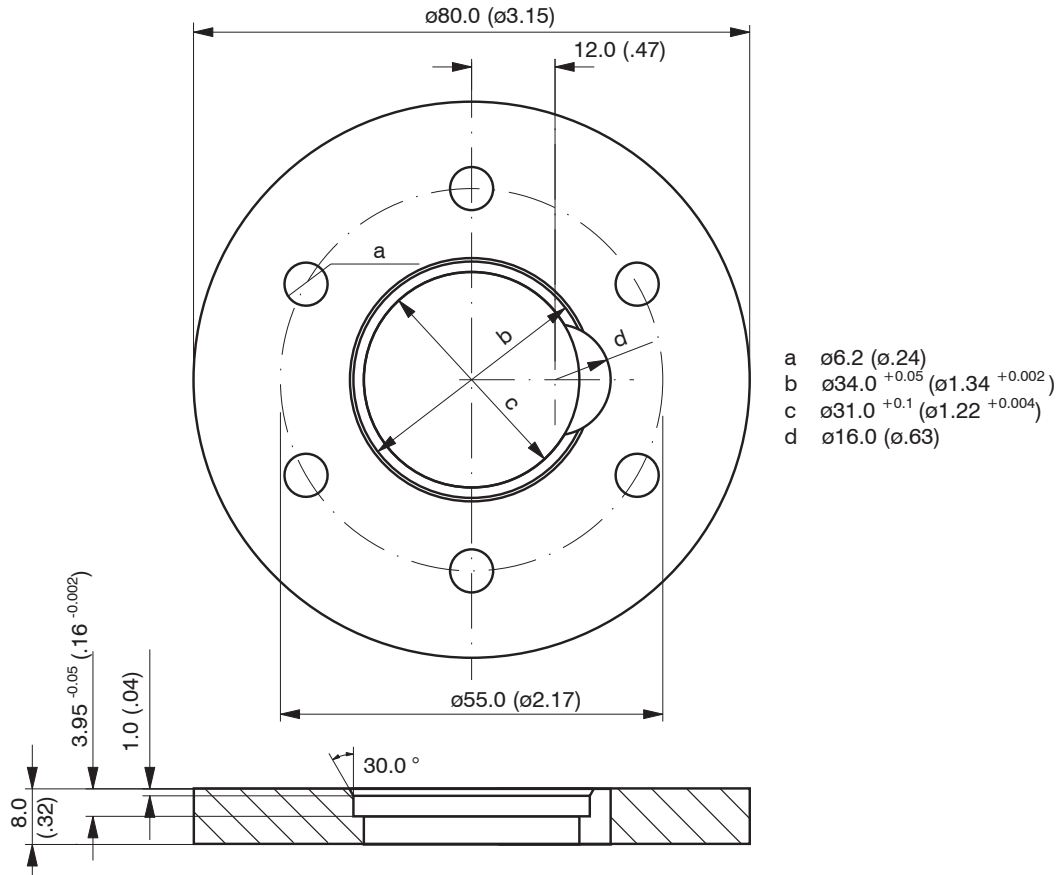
Mounting ring, EDS- ... -S model, dimensions in mm (inches)
